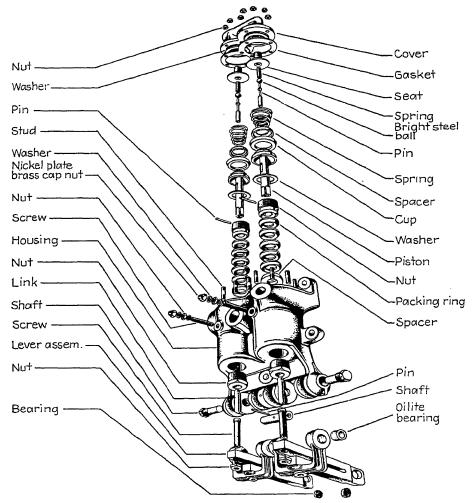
Valve assembly. Power-brake control. (Courtesy of Douglas $Air-craft\ Co.$)
